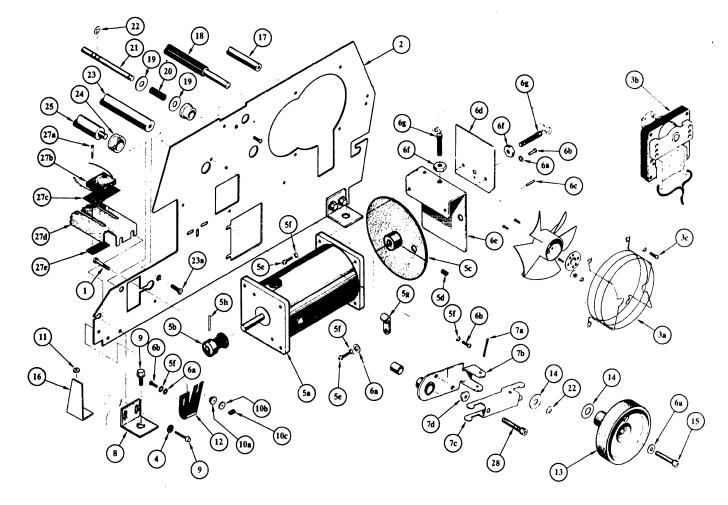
RIGHT HAND SIDE FRAME ASSEMBLY
